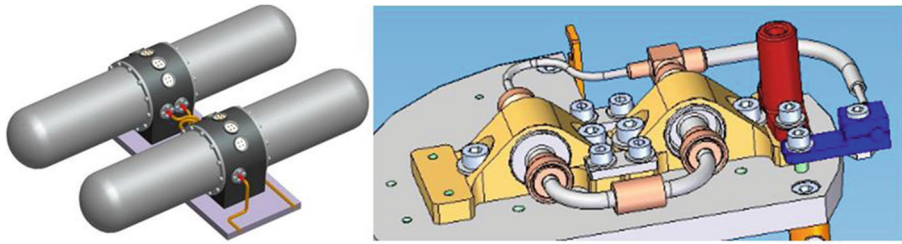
Right panel:* drawing of the EChO four stage compressor designed for the 2 K system (EChO system uses half of this). *Left panel:* cryo-cooler filter, expansion valve and liquid reservoir assembly
